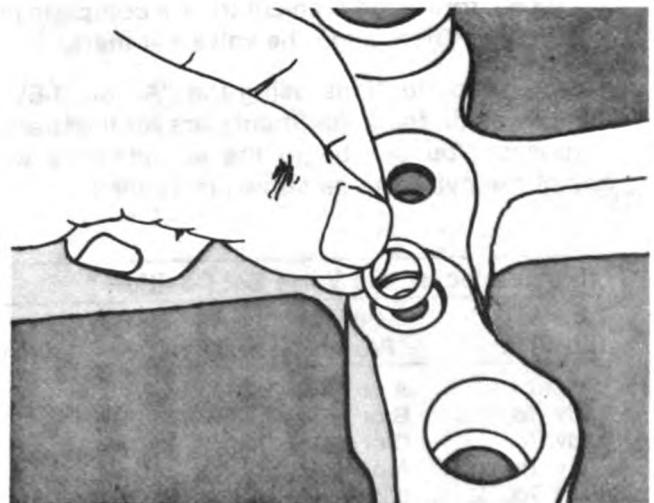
Install The Rubber Seal Into The Jacobs Brake Unit.
